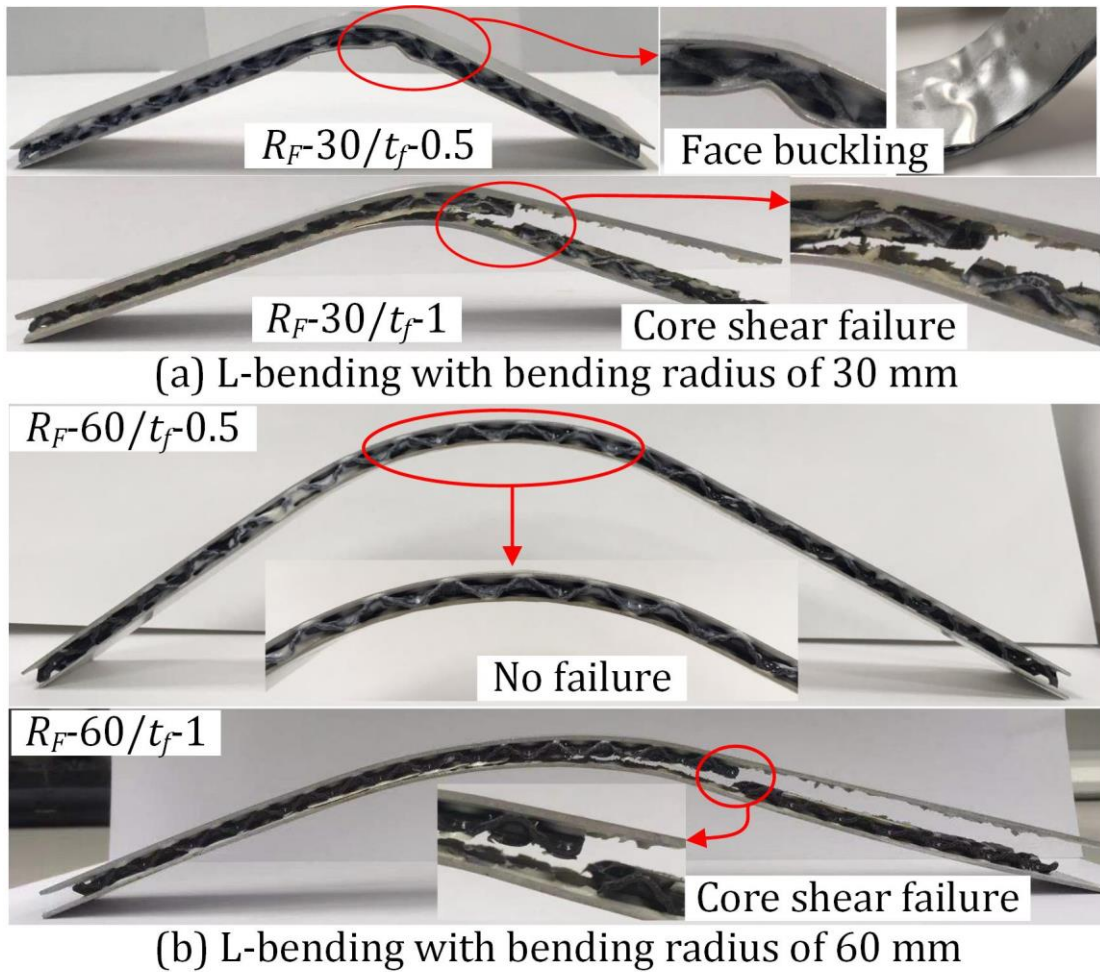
L-bending tests of sandwich sheets with A2017P face sheets: (a) bending radius of 30 mm; (b) bending radius of 60 mm.
